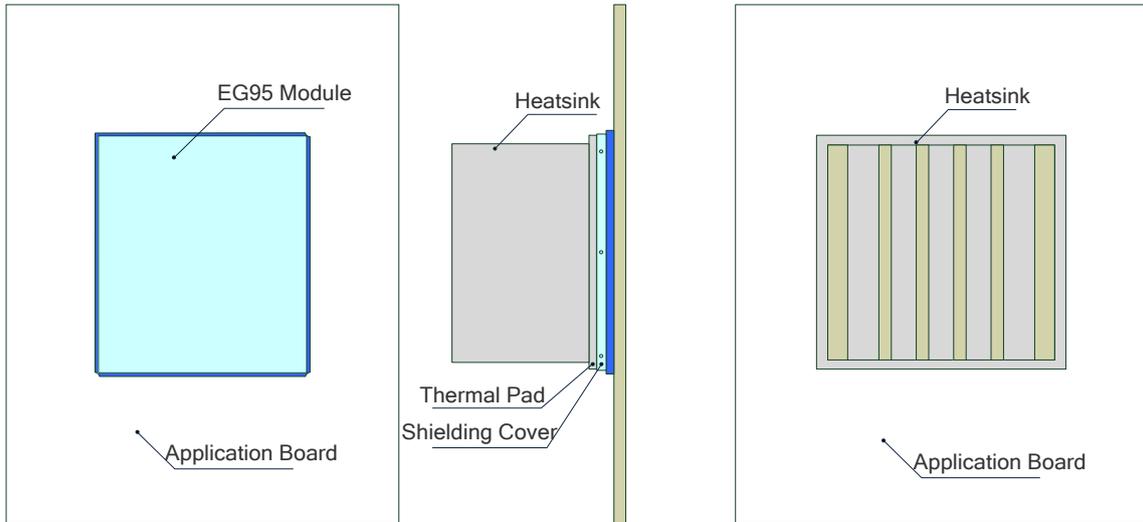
Referenced Heatsink Design (Heatsink at the Top of the Module)
